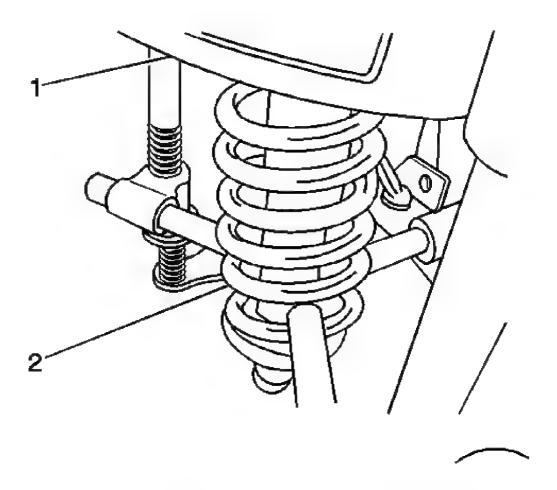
Compressing/Releasing Lower Part Of Shock Spring Courtesy of GENERAL MOTORS CORP.
